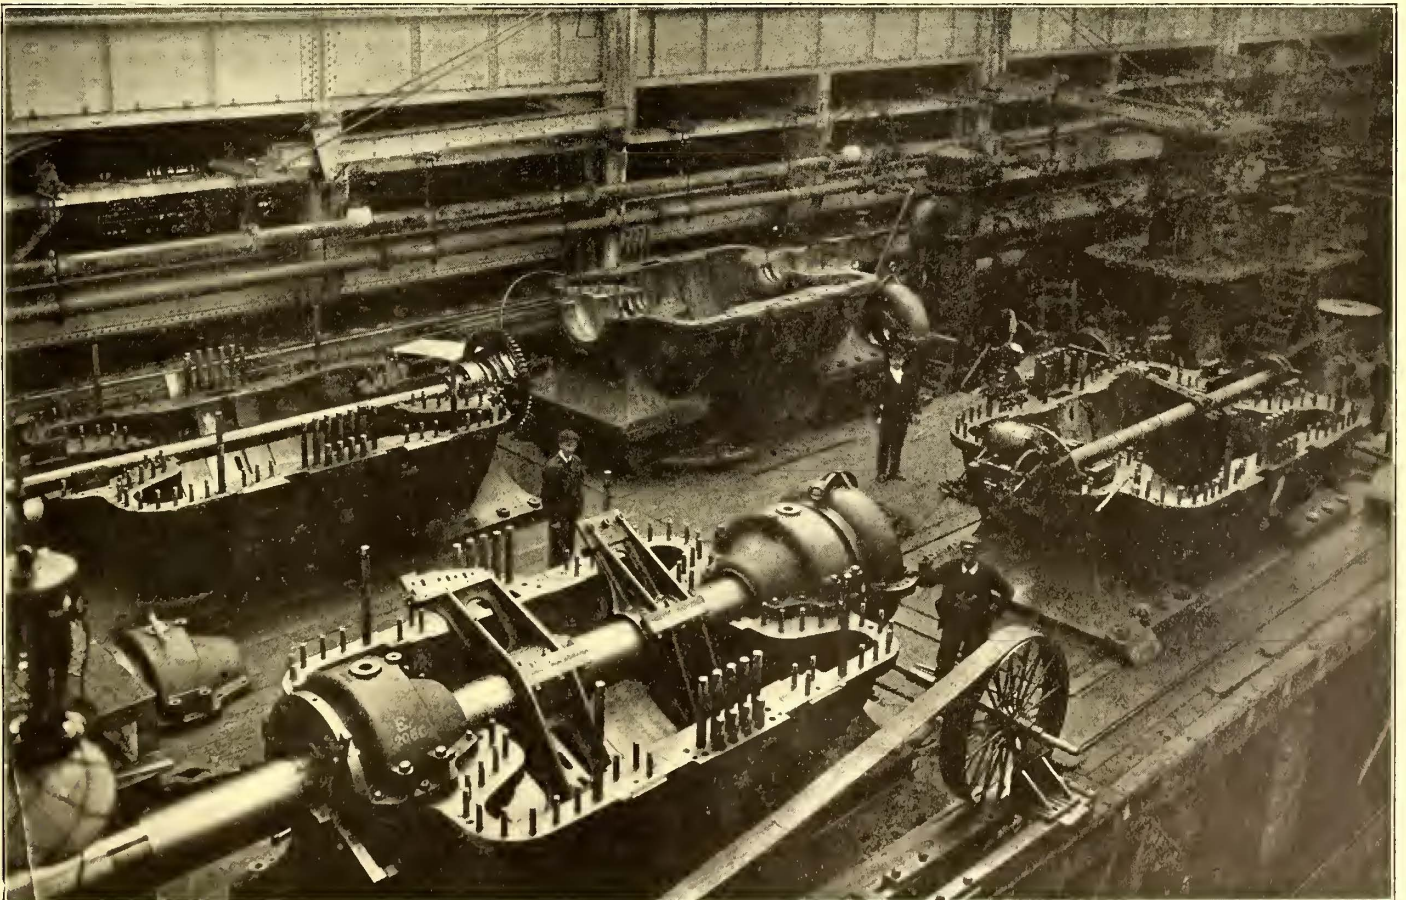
TURBO-ALTERNATORS BEING ASSEMBLED
